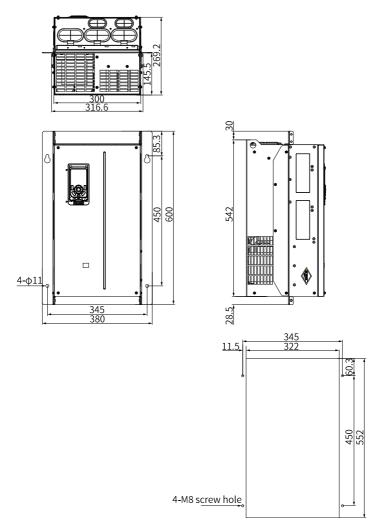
Mounting-hole dimensions (mm) of MD580-AZJ-A2T7
